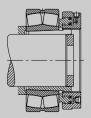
Dismounting of Withdrawal Sleeve by using Hydraulic Nuts
